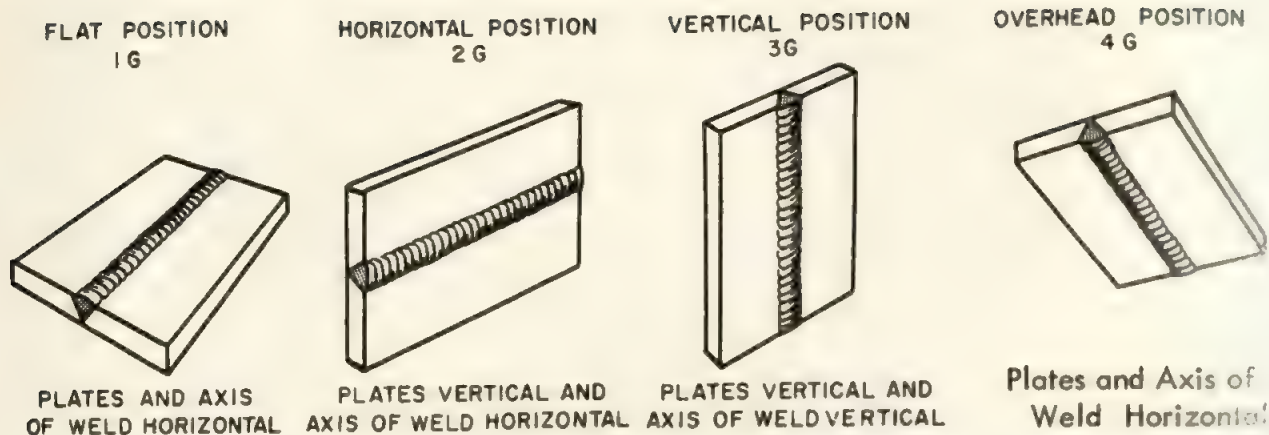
Welding positions for groove welds: plate.
